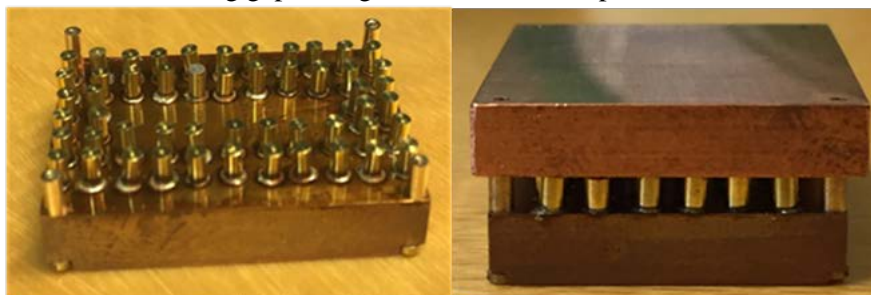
Groove resonator manufactured by pick and place machine (a) without top plate (b) with top plate.
